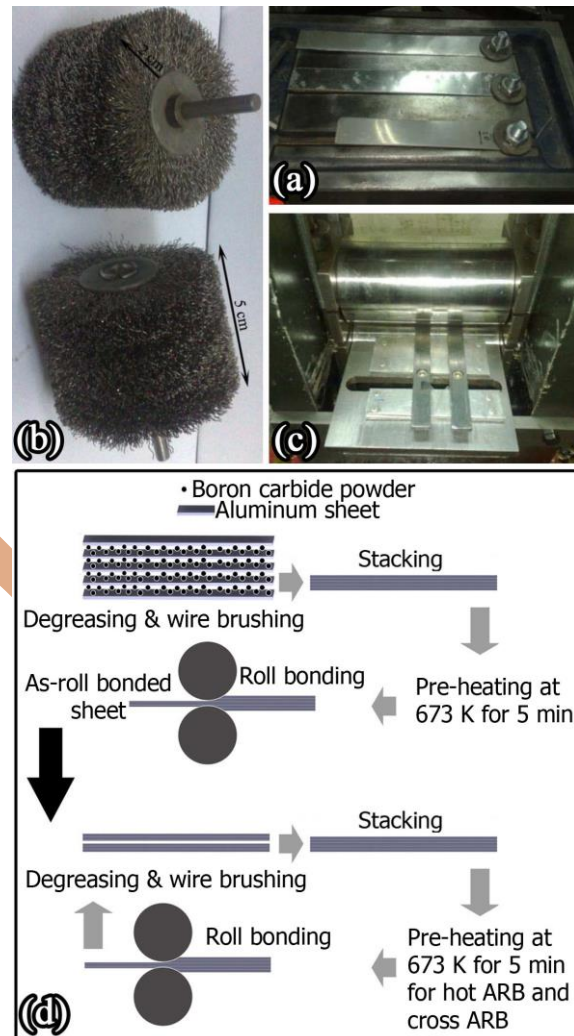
Experimental setup and applied routes: (a) wire brushing desk, (b) stainless steel circumferential brushes, (c) roll bonding process, and (d) schematic representation of the experimental processes used in this work.
